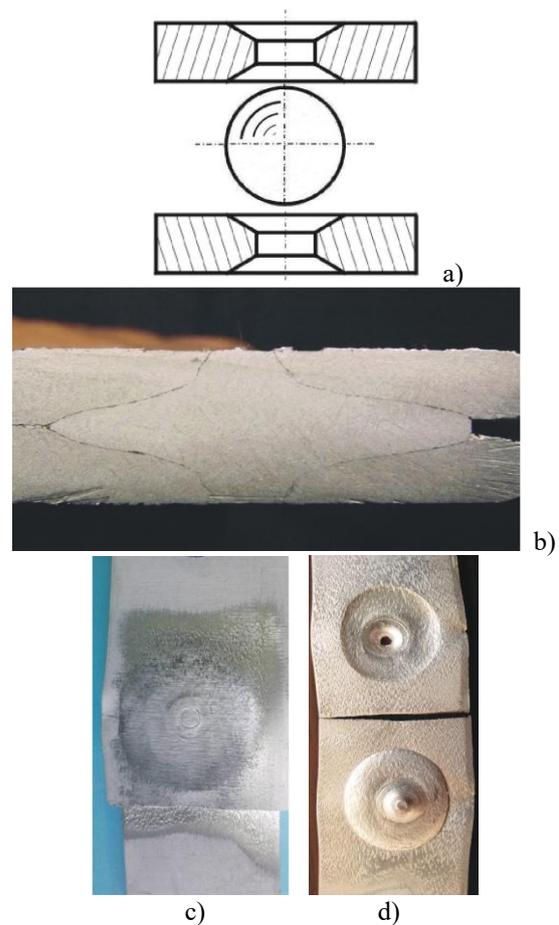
Welding with drilled and double-countersunk plates
